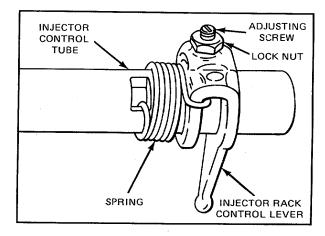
Injector Control Tube and Rack Lever (Spring-Loaded)
